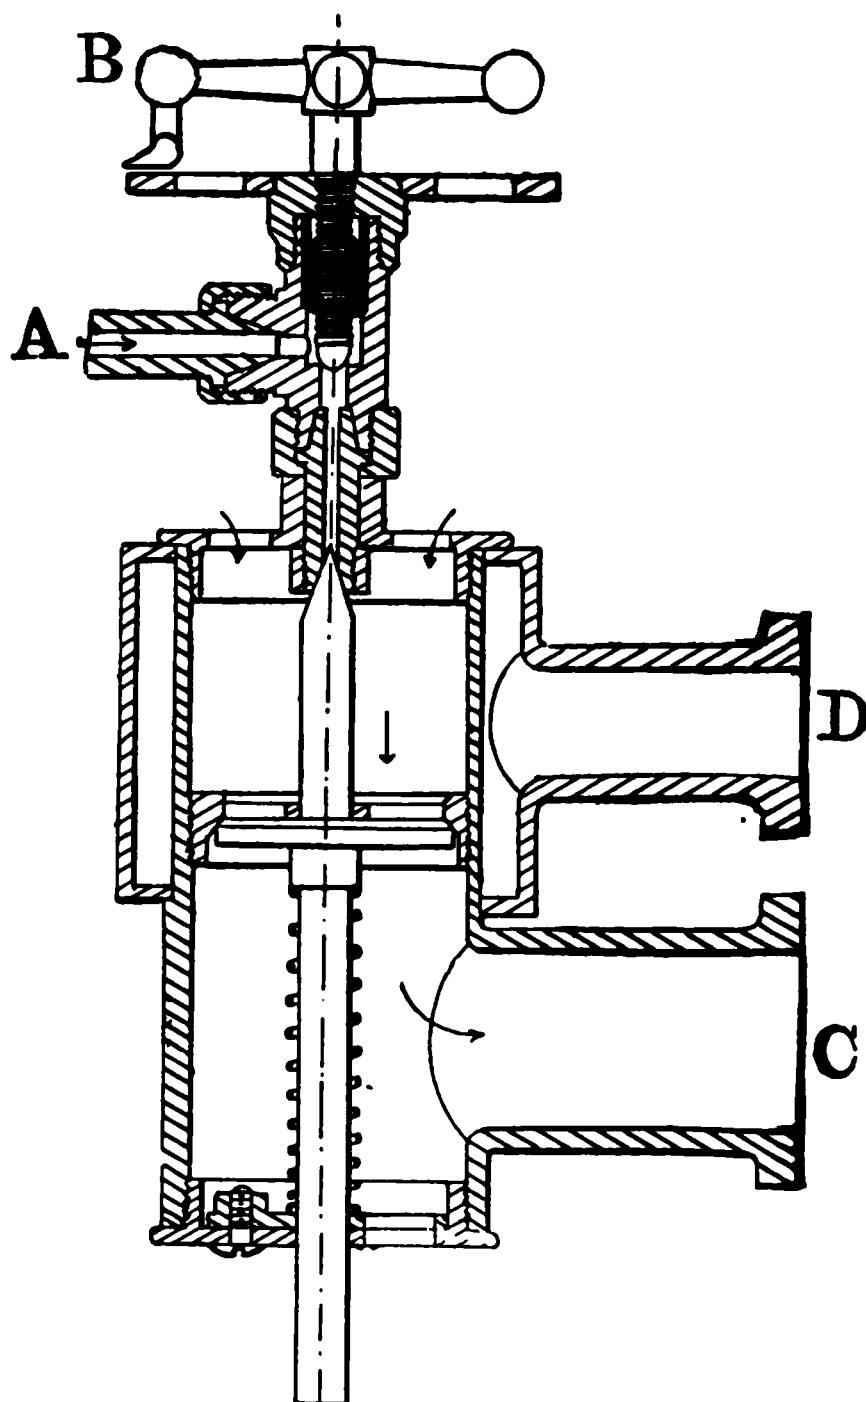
The Huzelstein Carburetter. A is the inlet for gasoline; B, the valve controlling inlet; C, the tube leading to cylinder combustion space; D, tube for leading hot exhaust gases around the jacket on the mixing chamber. Arrows indicate entrance for air and course of mixture to cylinder.
